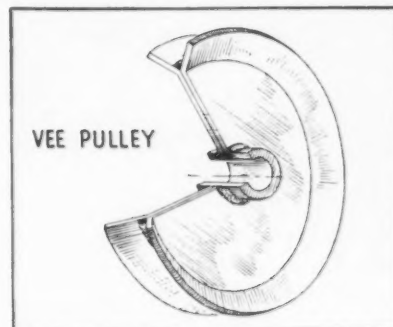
Pulley is fabricated from two steel discs formed to produce a vee-shaped rim.
